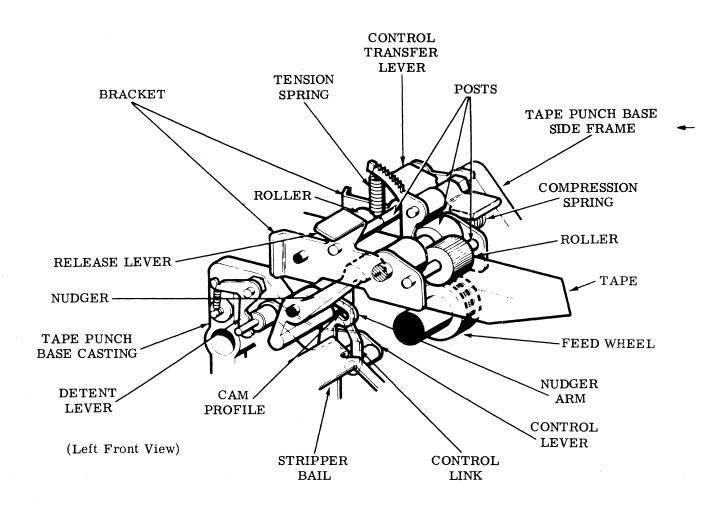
Tape Guide Assembly (Tape Feed Mechanism)
